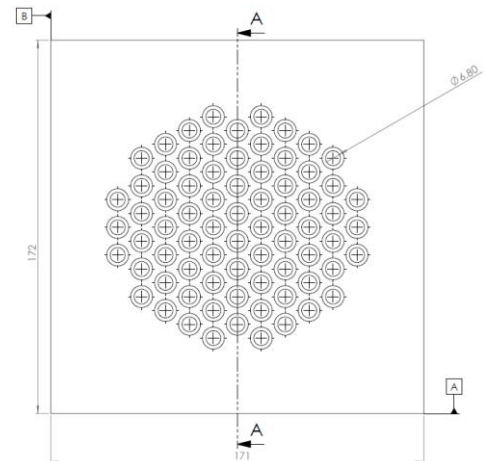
Drilling pattern, datum edges and coupon measurements
